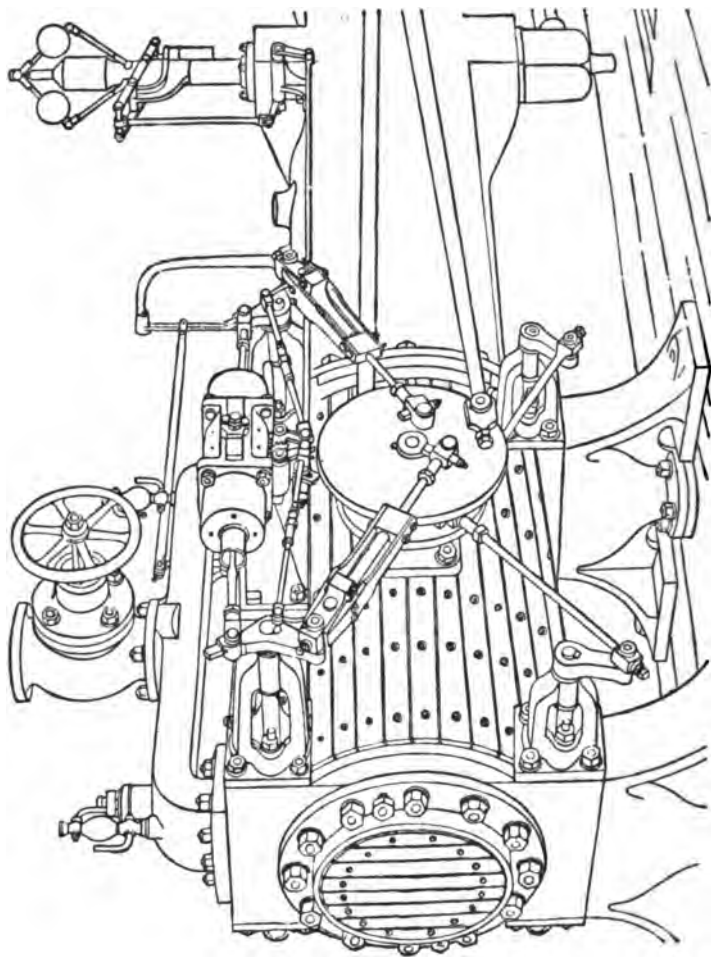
Engine Cylinder with Corliss Valve-gear.
